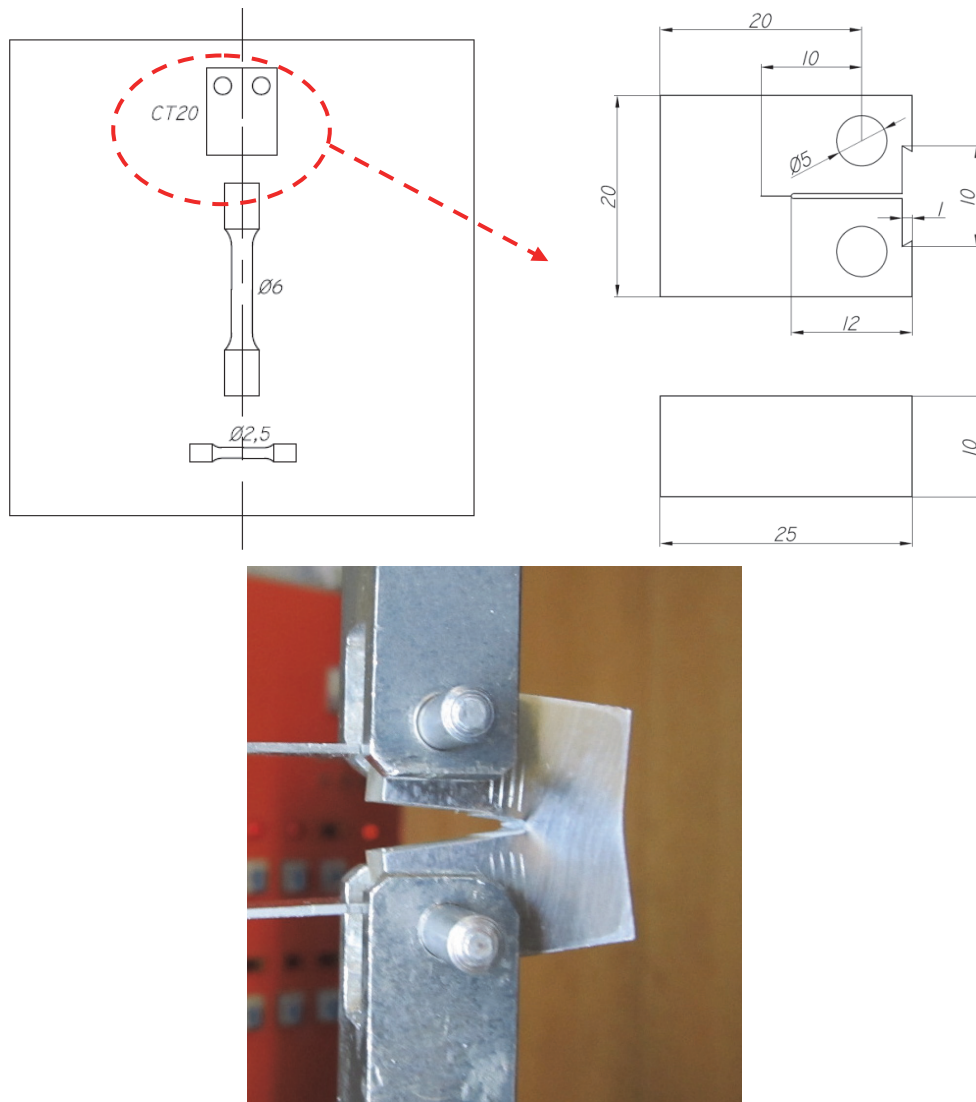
Compact tension (CT) specimen - drawing and photograph of testing
